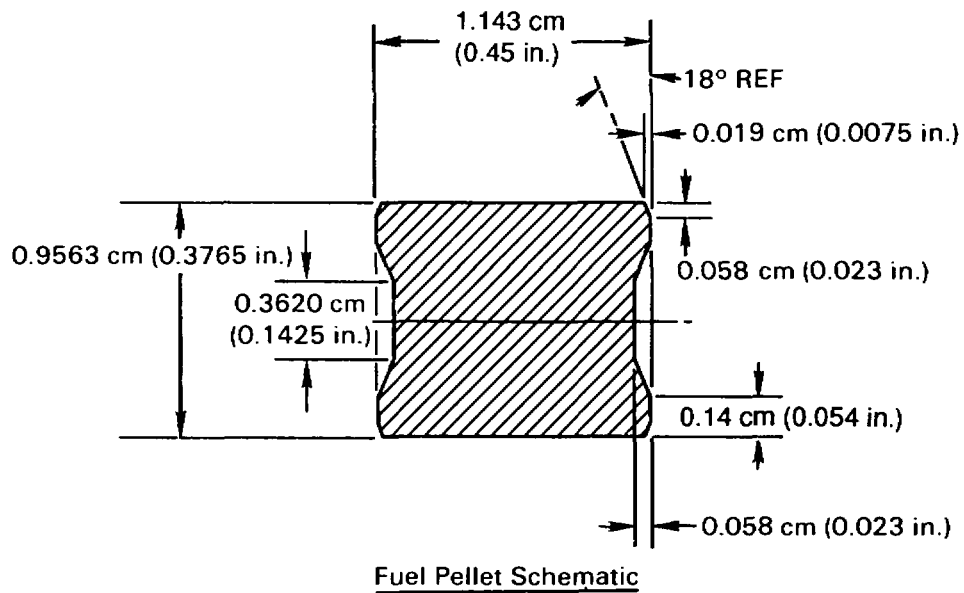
ATM-104 Pellet and Fuel Rod Dimensions
